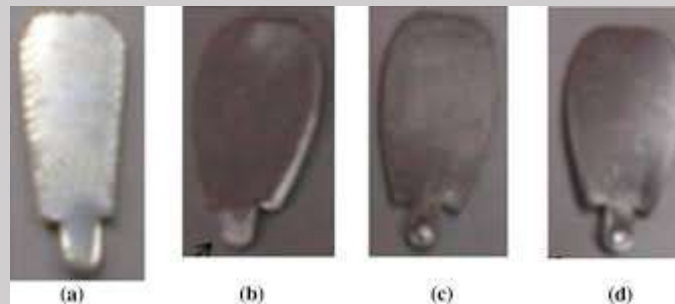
Current stages in producing AUV blade, (a) blanking, (b) shearing, (c) embossing and (d) twisting ³
